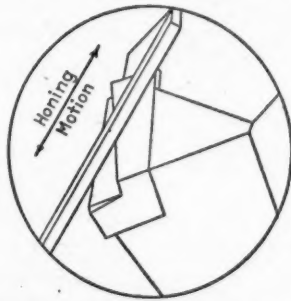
Method of honing the cutting edge of a negative rake turning tool at a 45-deg. angle
